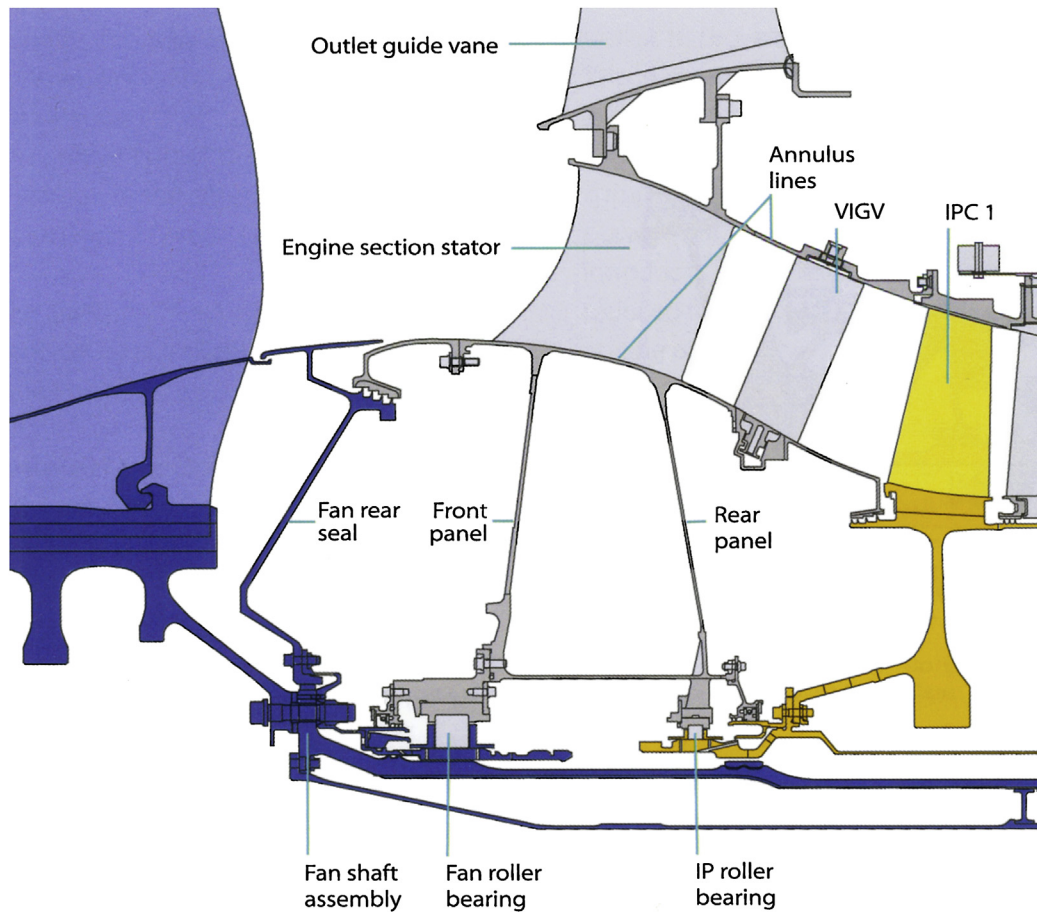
Front bearing housing on a three-shaft engine locating the LP and IP front roller bearings. The configuration and functions of the FBH are highly dependent on the engine architecture. (Source: Rolls Royce.)
